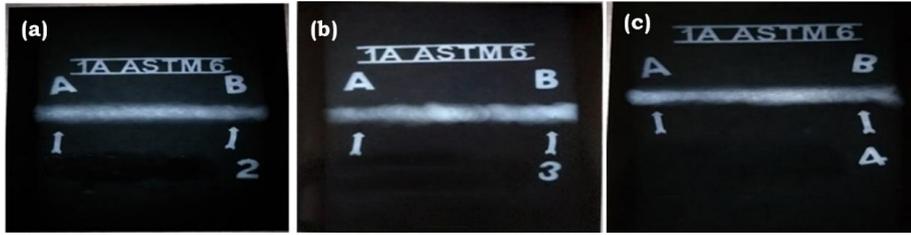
X-ray radiographs of dissimilar welds joined by using (a) ERNiCrMo-4, (b) ERNiCrMo-3 and (c) ER309L fillers.
